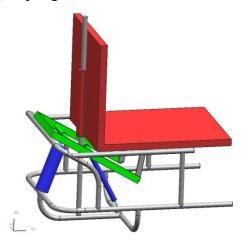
Isometric View of Pneumatic Linkage Lifting Mechanism
